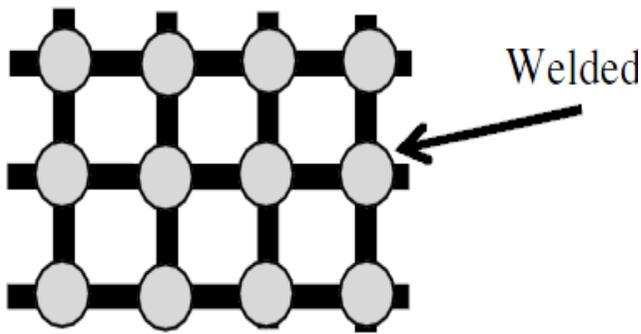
Illustration of welded points in SRPE pipes [13].
